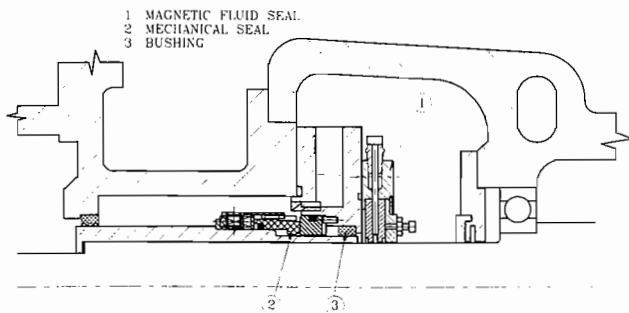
Cross Sectional View of a Centrifugal Pump, Showing the Primary Mechanical Seal and the Secondary Magnetic Fluid Seal.
